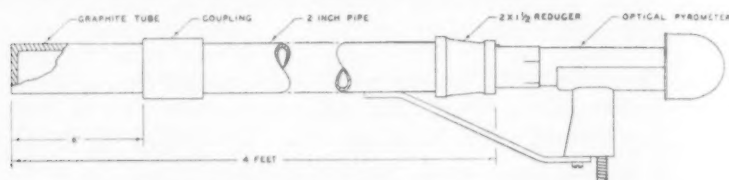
BLACK BODY TUBE USED WITH OPTICAL PYROMETER.
